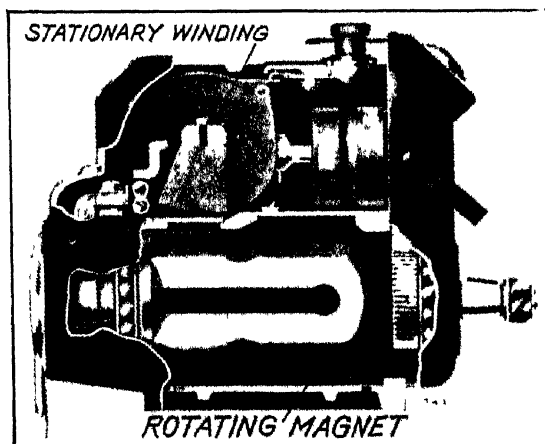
Sectional view of Scintilla magneto showing rotating magnet and stationary winding.
